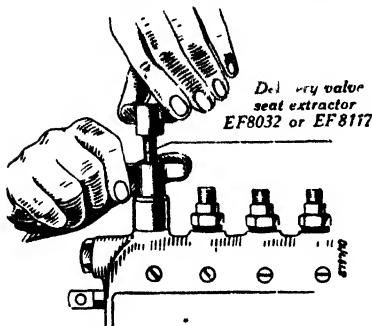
Extracting Fuel Pump Delivery Valve.
